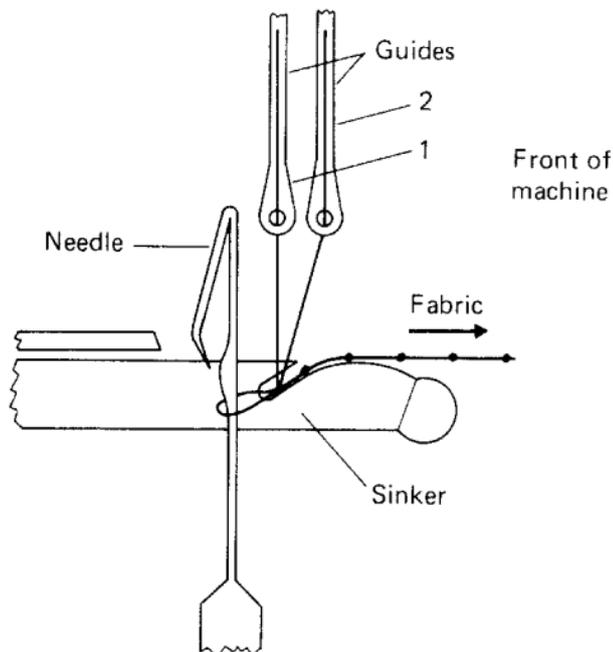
Knitting elements in a bearded needle tricot machine [2]
